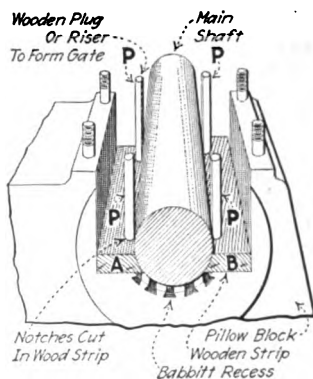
Showing method of closing, gating and venting babbitt recess in pillow block when re-babbiting a non-removable bottom shell. A bearing so prepared is tamped with moulding sand or fire clay as shown in Fig. 461. The plugs, P, are set into notches in A and B, which notches later form gates for the babbitt.
